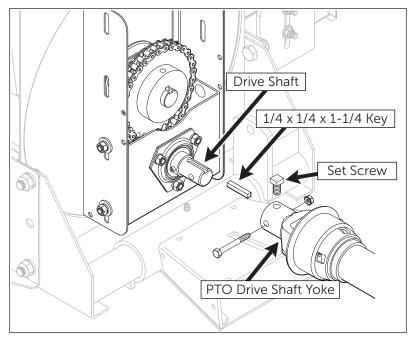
Attach PTO Drive Shaft Yoke to Snowblower Drive Shaft
